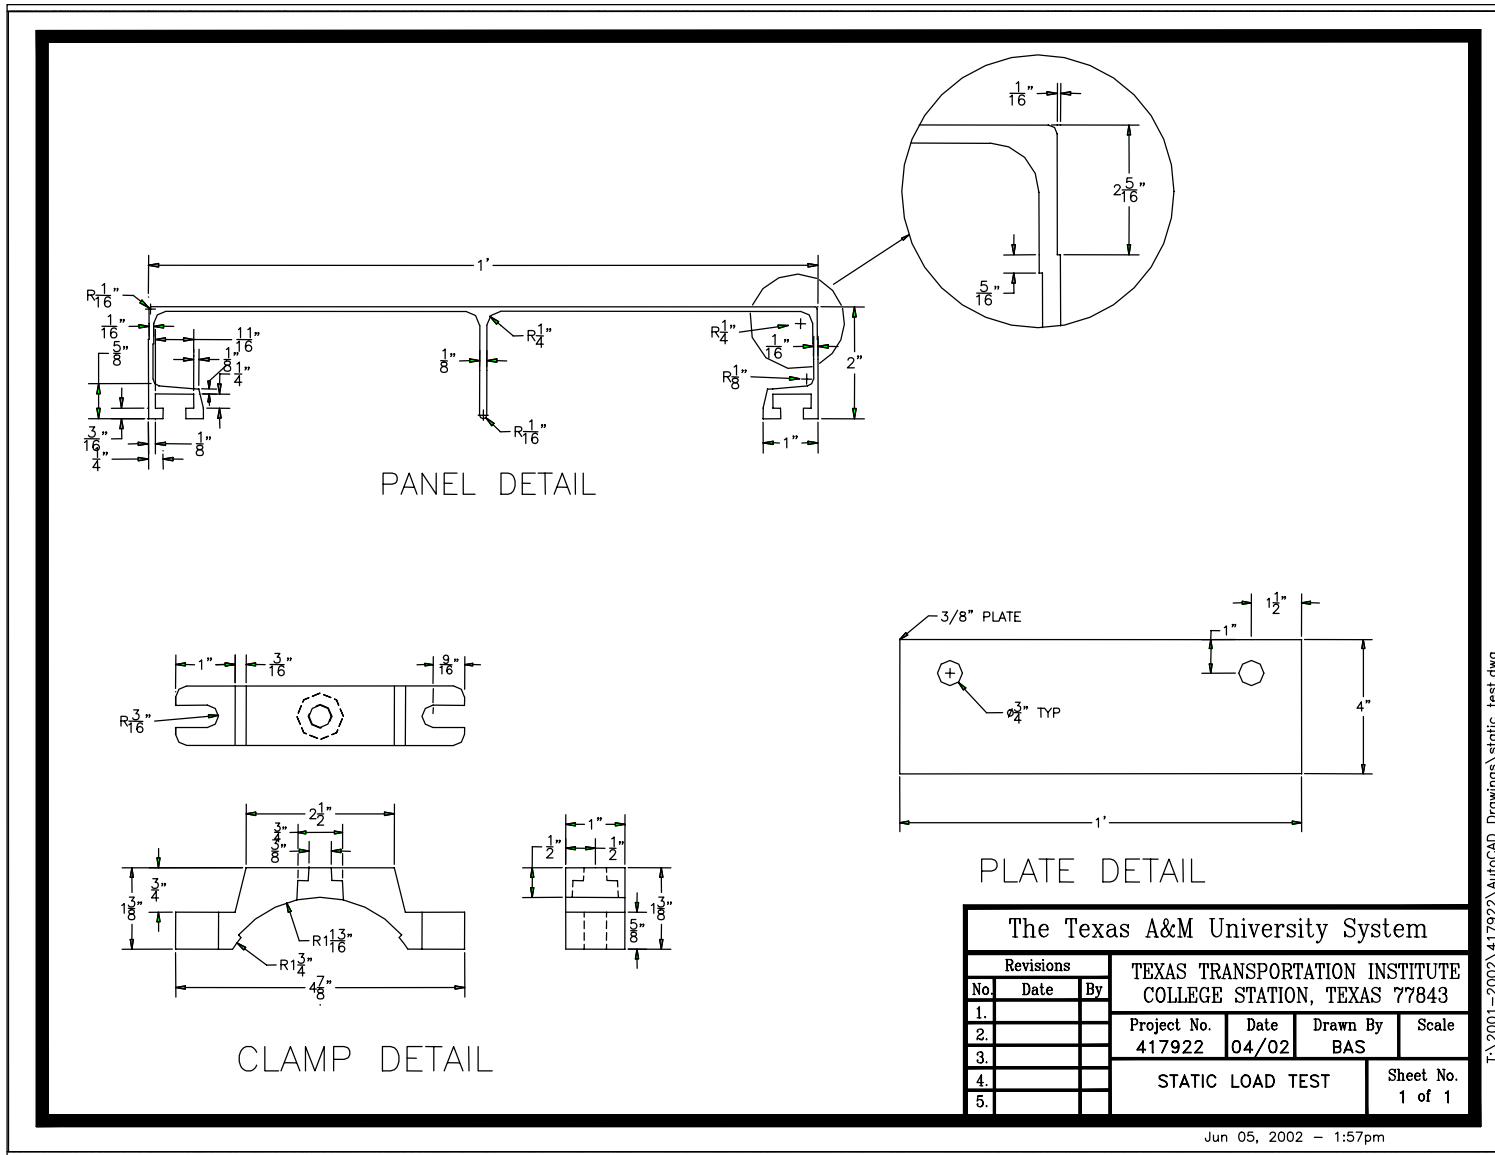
Details of the Extruded Aluminum Sign Panel and Standard Universal Pipe Clamp.
